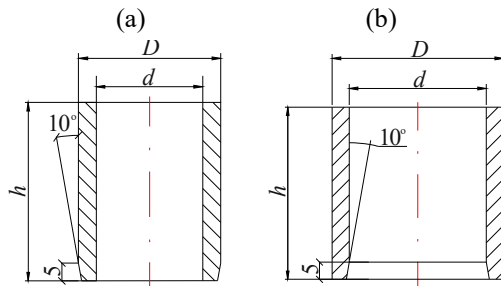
Powder cylinder-shaped liner: (a) to restore the “shaft”-type parts; (b) to restore the “hub”-type parts
